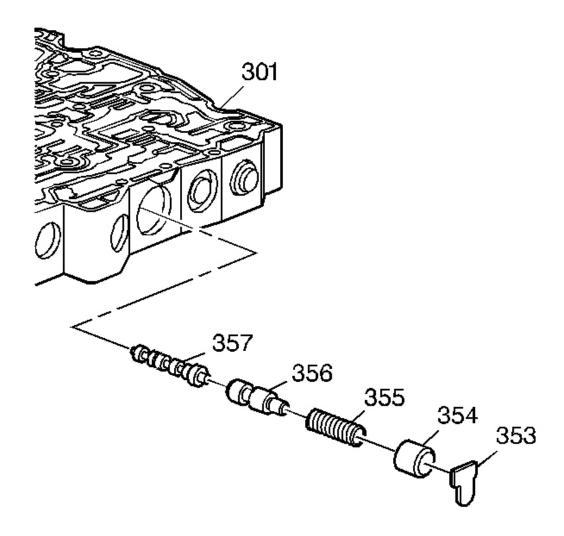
Identifying 3-2 Manual Downshift Valve & 2-3 Shift Valve Courtesy of GENERAL MOTORS CORP.
